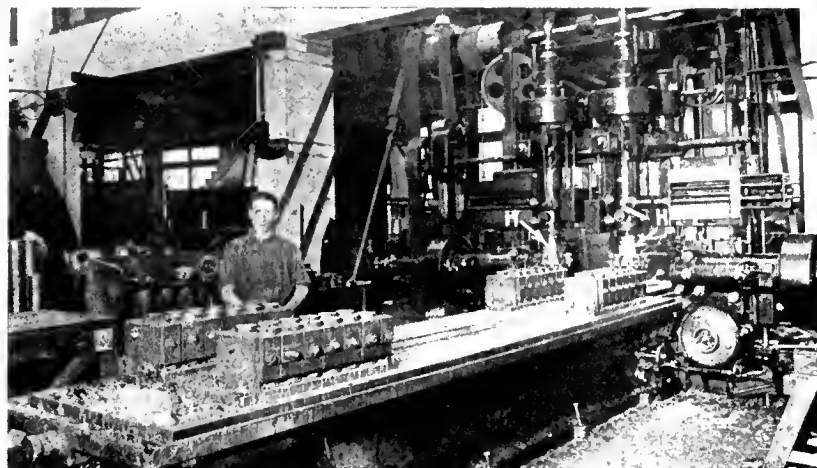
ROUGH MACHINING BASES IN HORIZONTAL MILLING MACHINE.
